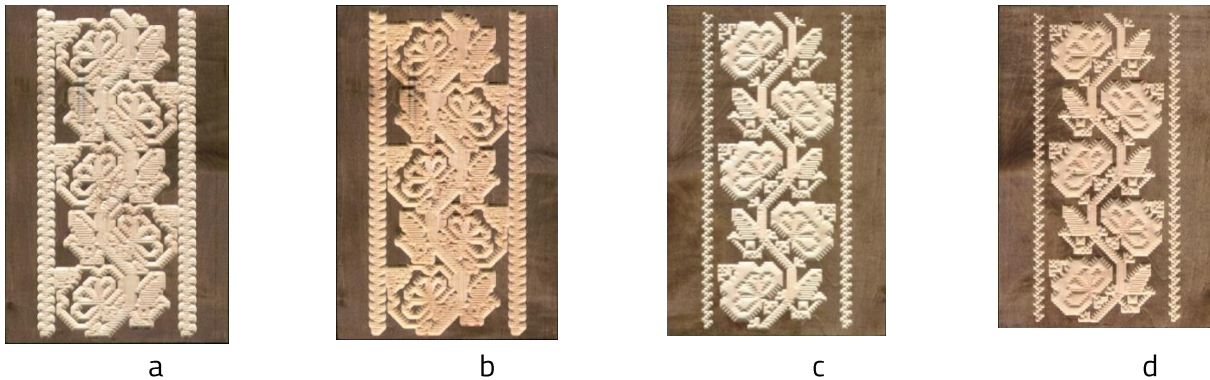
Model 33 milled on a colored surface: a - CNC processing using the Engrave method; b - lacquering; c - CNC processing using the V-Carve method; d - lacquering.
